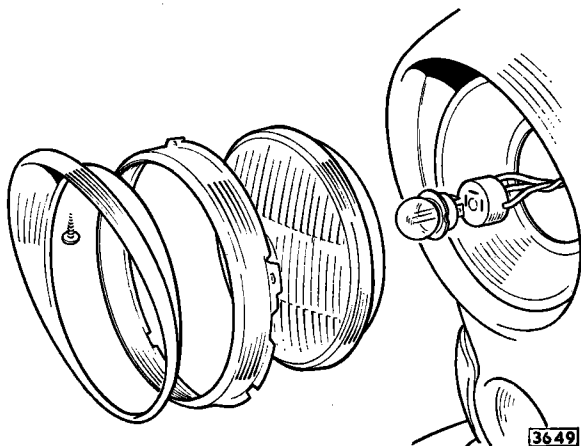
The outer headlight unit removal (non-sealed beam unit)
